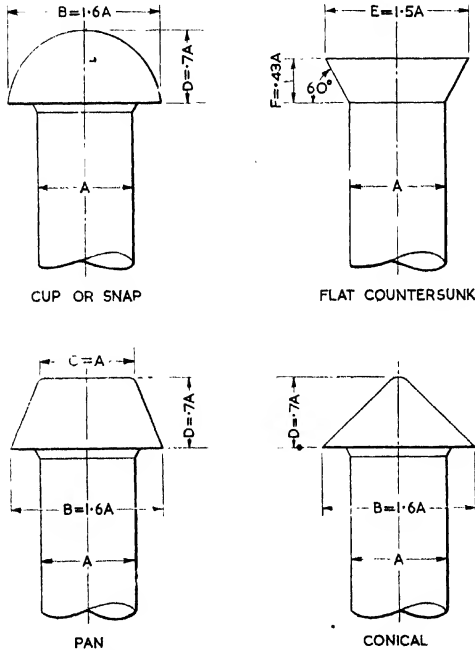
DIMENSIONS FOR FOUR GENERAL TYPES OF RIVET HEADS
